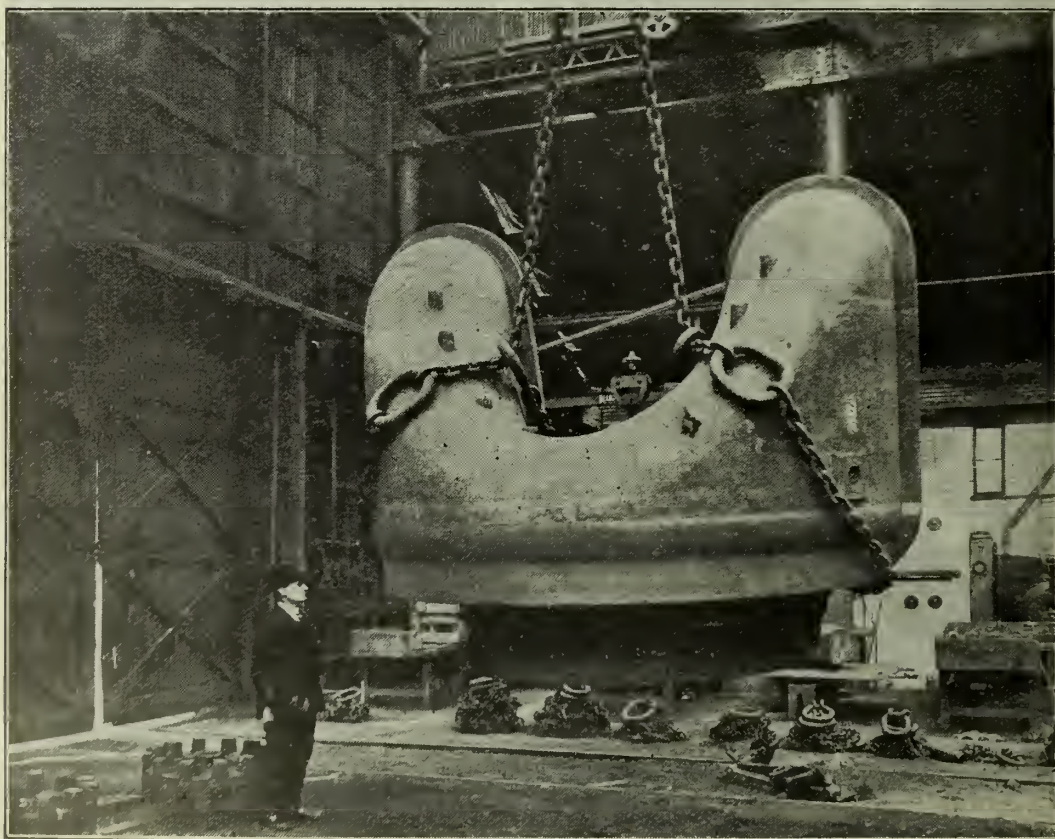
THE EXTERIOR OF THE CASTING AS IT LEFT THE MOULD—MESSRS. FRASER & CHALMERS.
